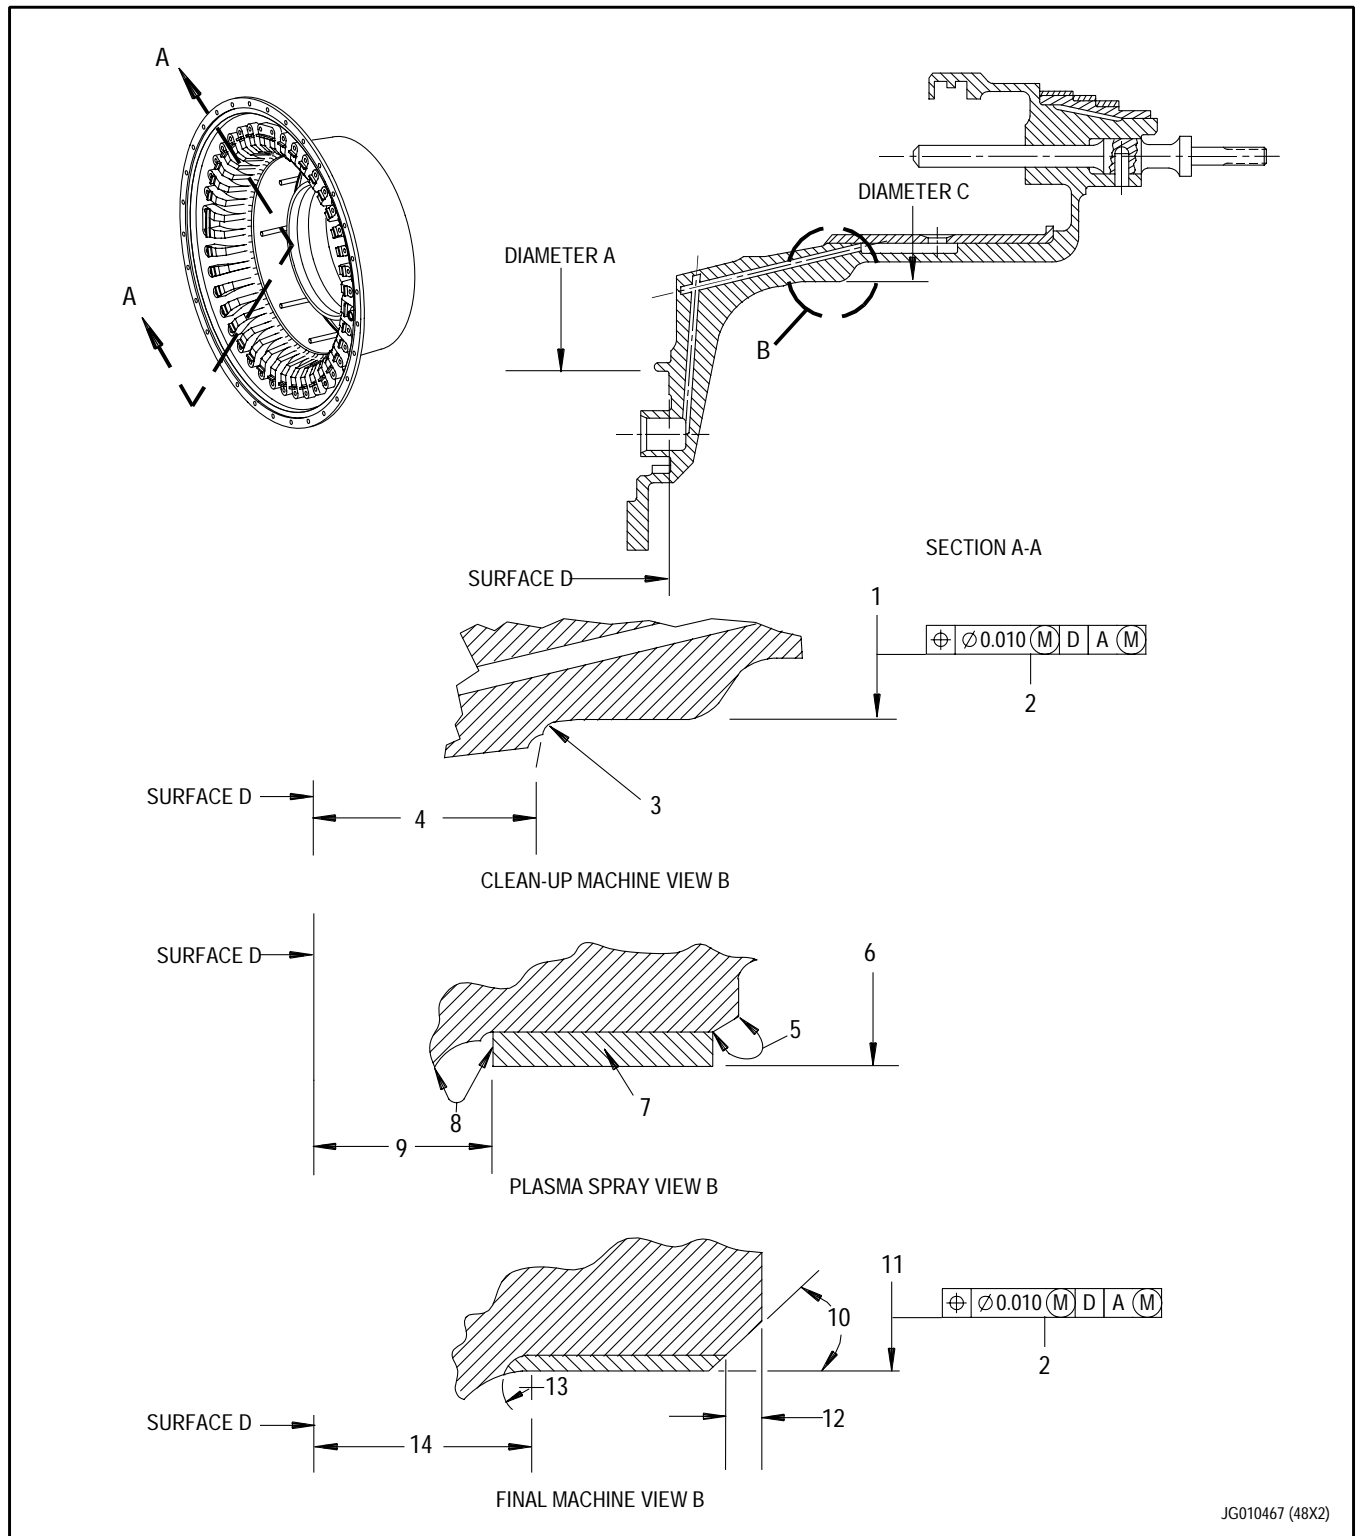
No. 3 Bearing Seal Support Assembly - Heat Shield Snap Diameter Repair
